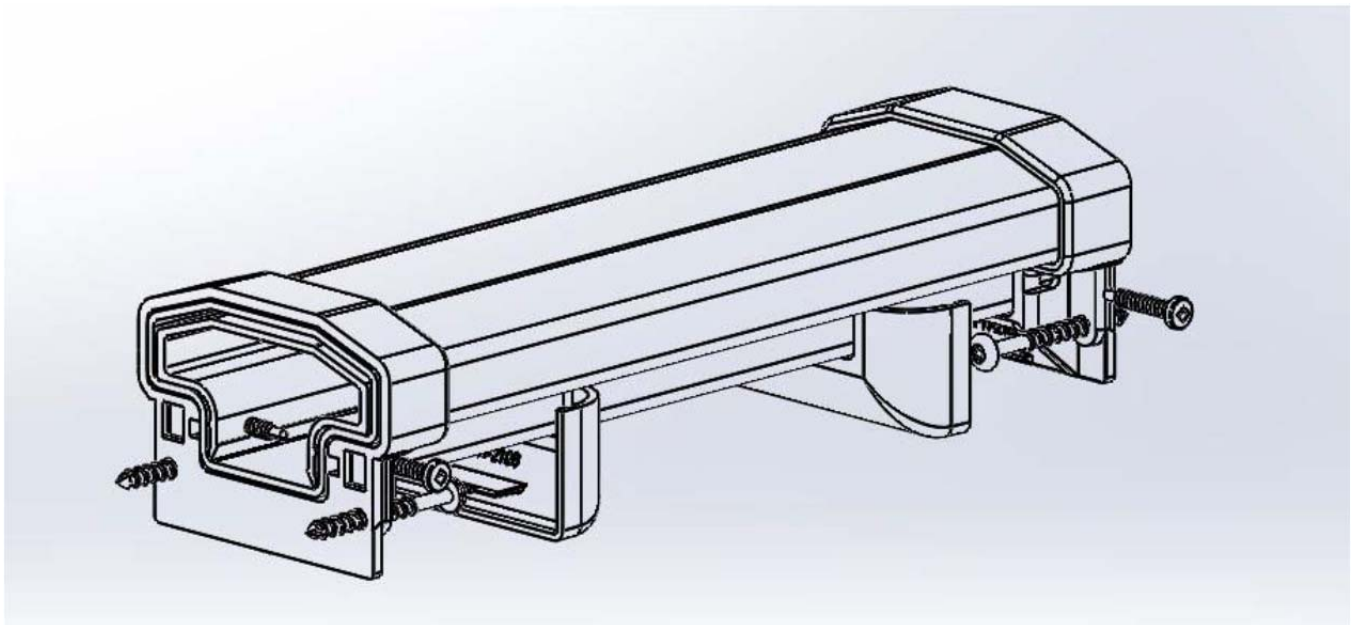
TOP RAIL MOUNTING ASSEMBLY
